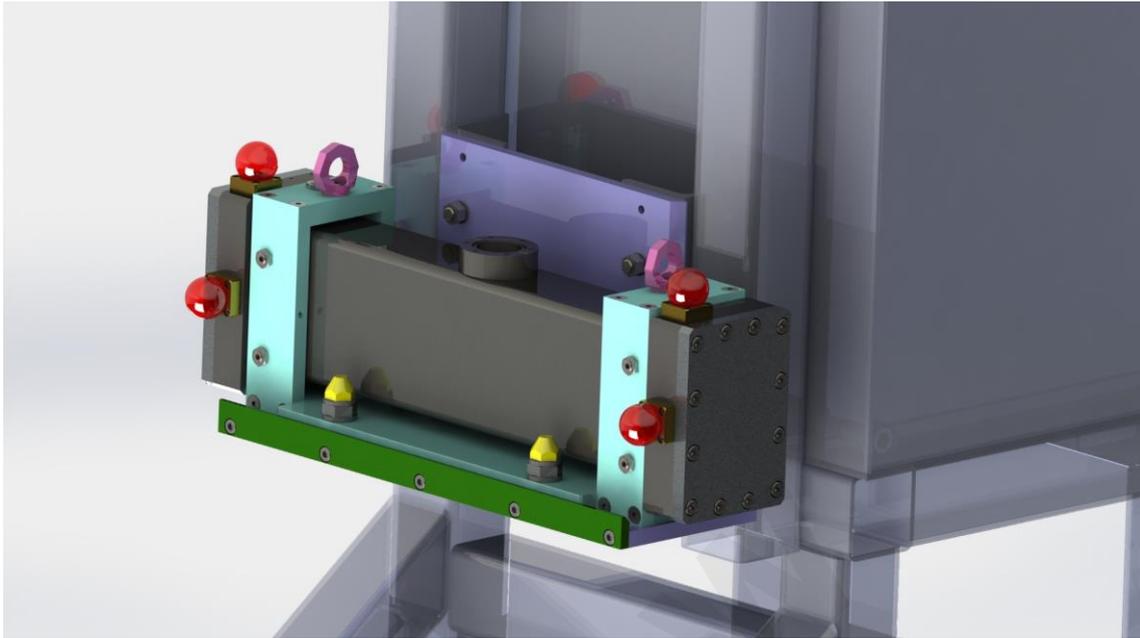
Closer view of the W02-13 vacuum housing mounted on the pendulum mechanism with the mounting unit.
